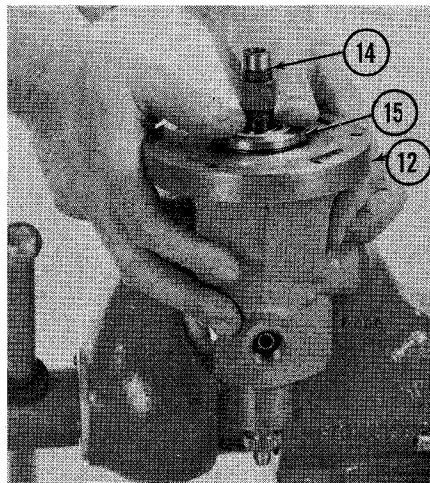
When pushing bearing support (15) into housing (12), be careful not to damage the "O" ring on outside groove of support.
